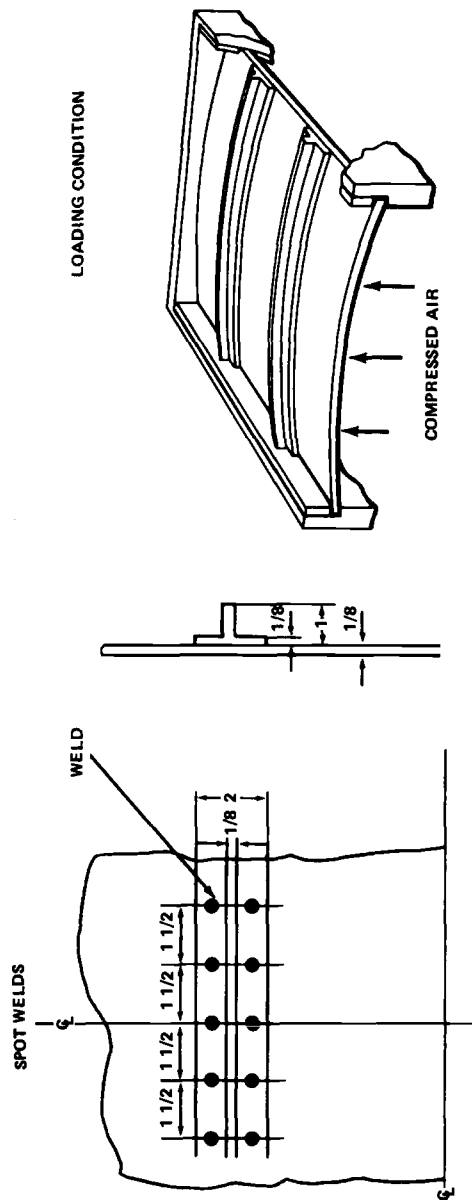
Spot weld location in weldbonded stiffened panel and loading conditions (all dimensions in inches; 1 in. = 25.4 mm).
